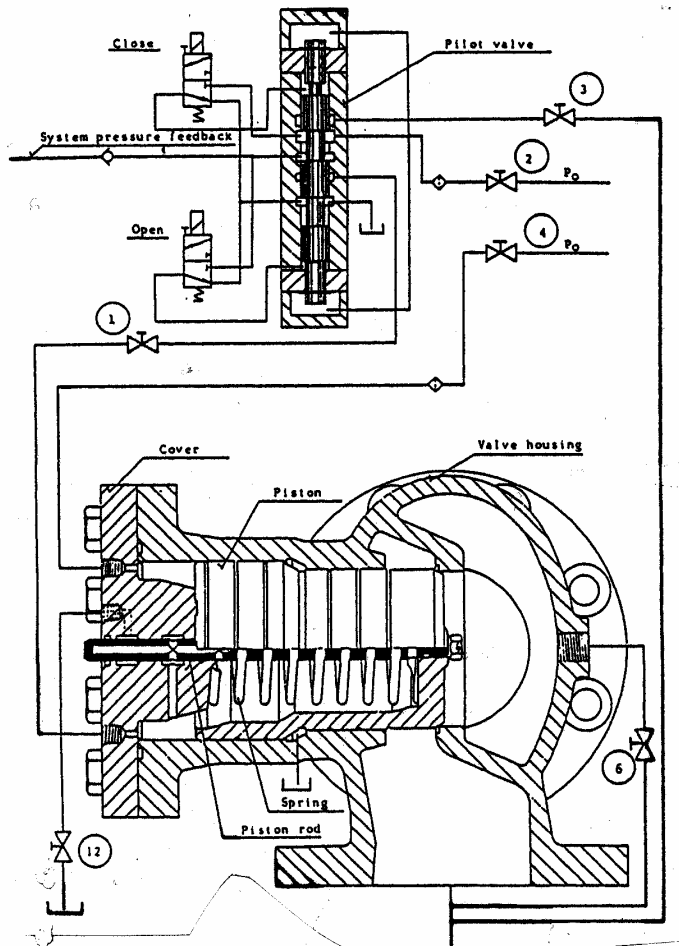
Main valve with pilot valve (schematically drawn) /2/
